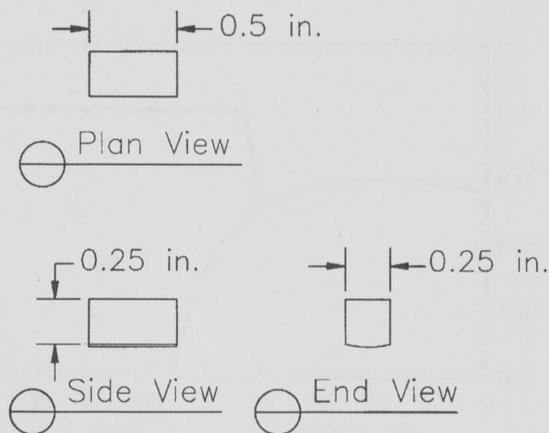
Reinforcing steel specimen for friction test (1 in. = 25.4 mm).
